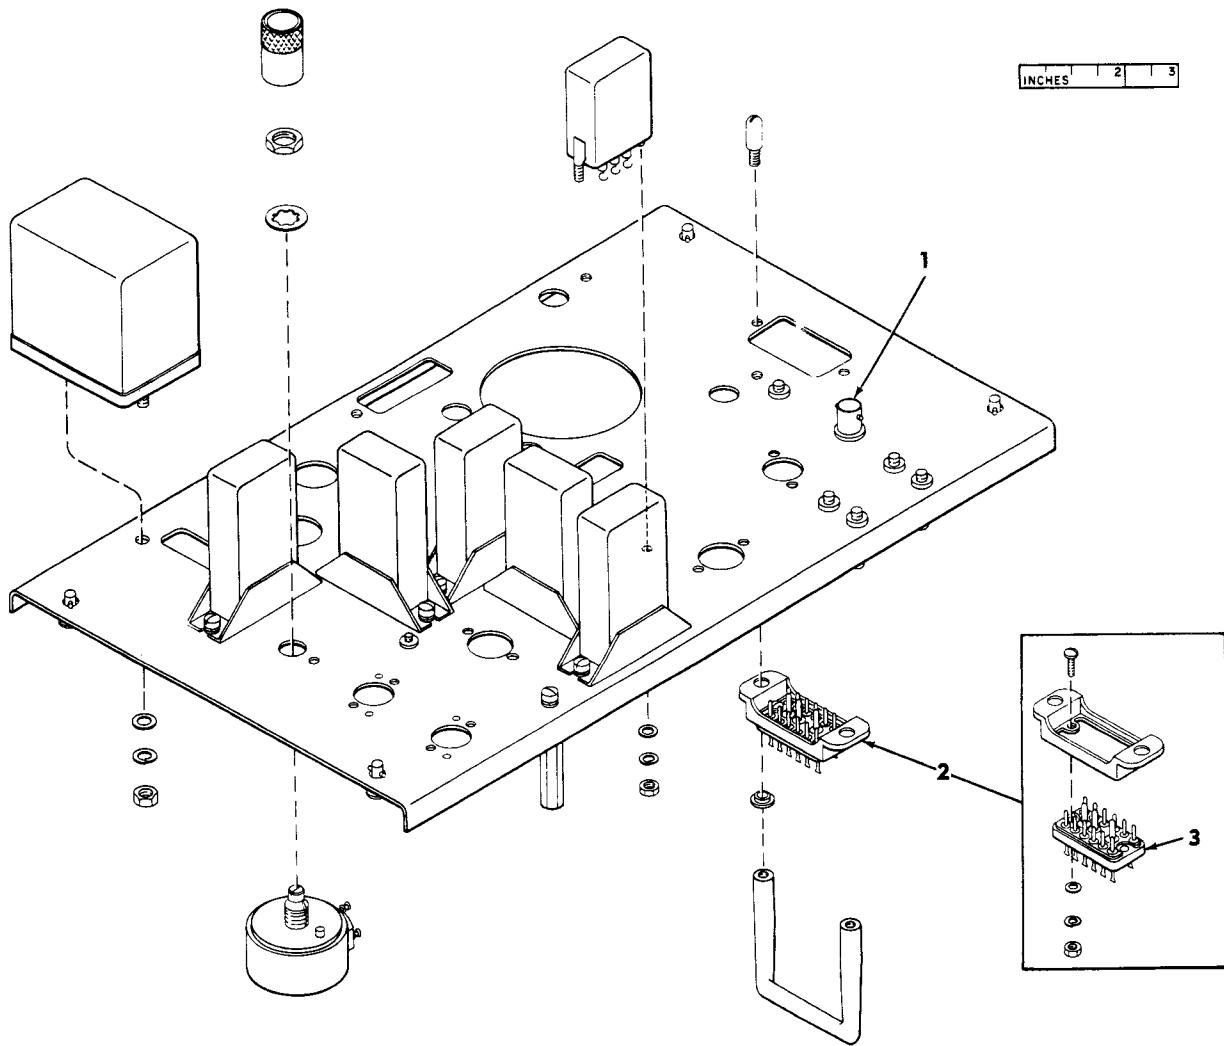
Oscilloscope OS-49/M (8007722) - partial exploded view
